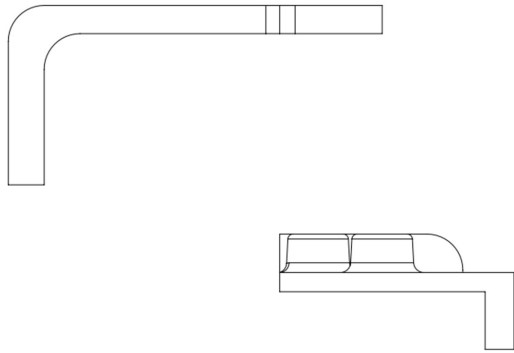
Side Exploded View of Assembling C-Clamp Arm to Base
